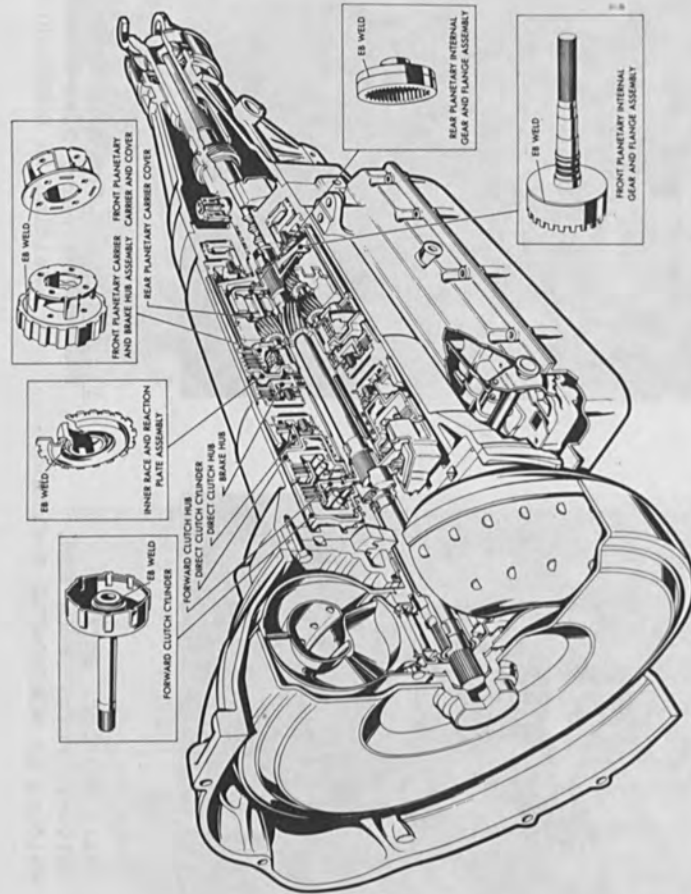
Cutaway View of Three-Speed Automatic Transmission Showing Location of 5 E.B. Welded Components.
